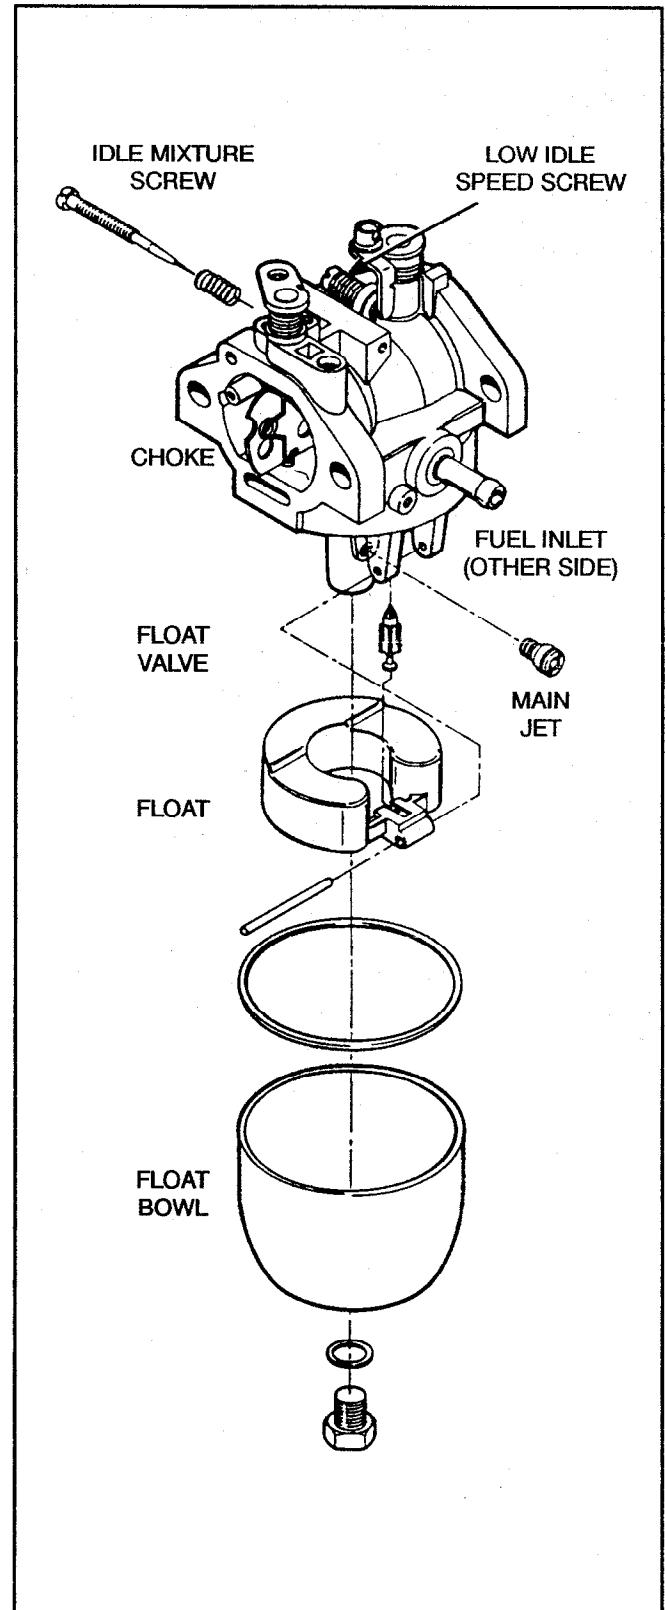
GASOLINE CARBURETOR (SPEC C)
